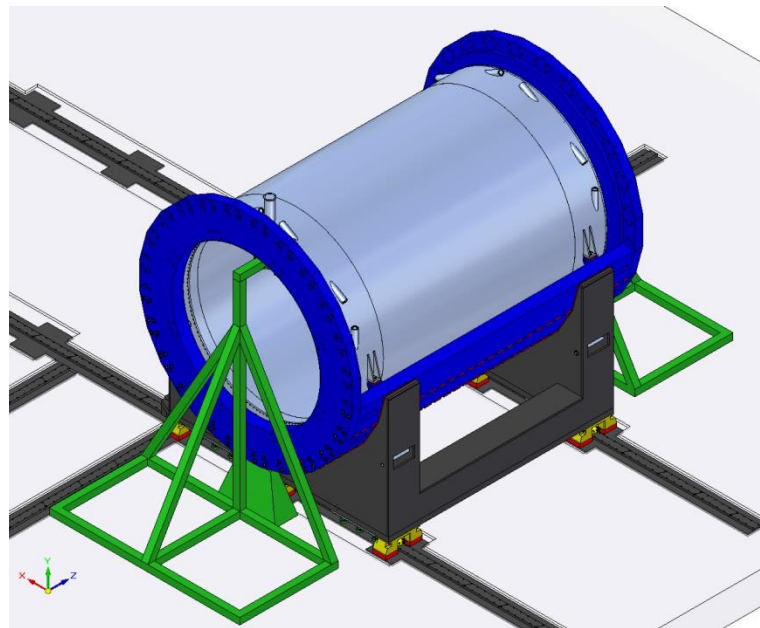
Mounting of the cryostat after assembling eleven lower beams and the support rings
